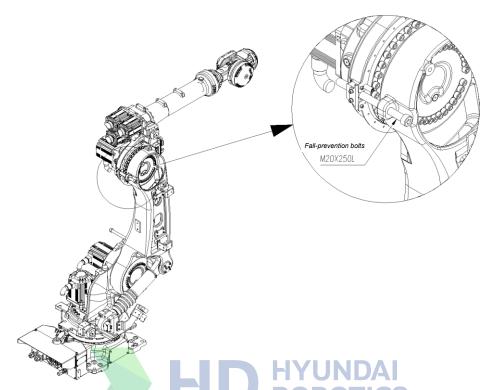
Position for Inserting the Fixing Bolt for the Secondary Arm (V Axis)
